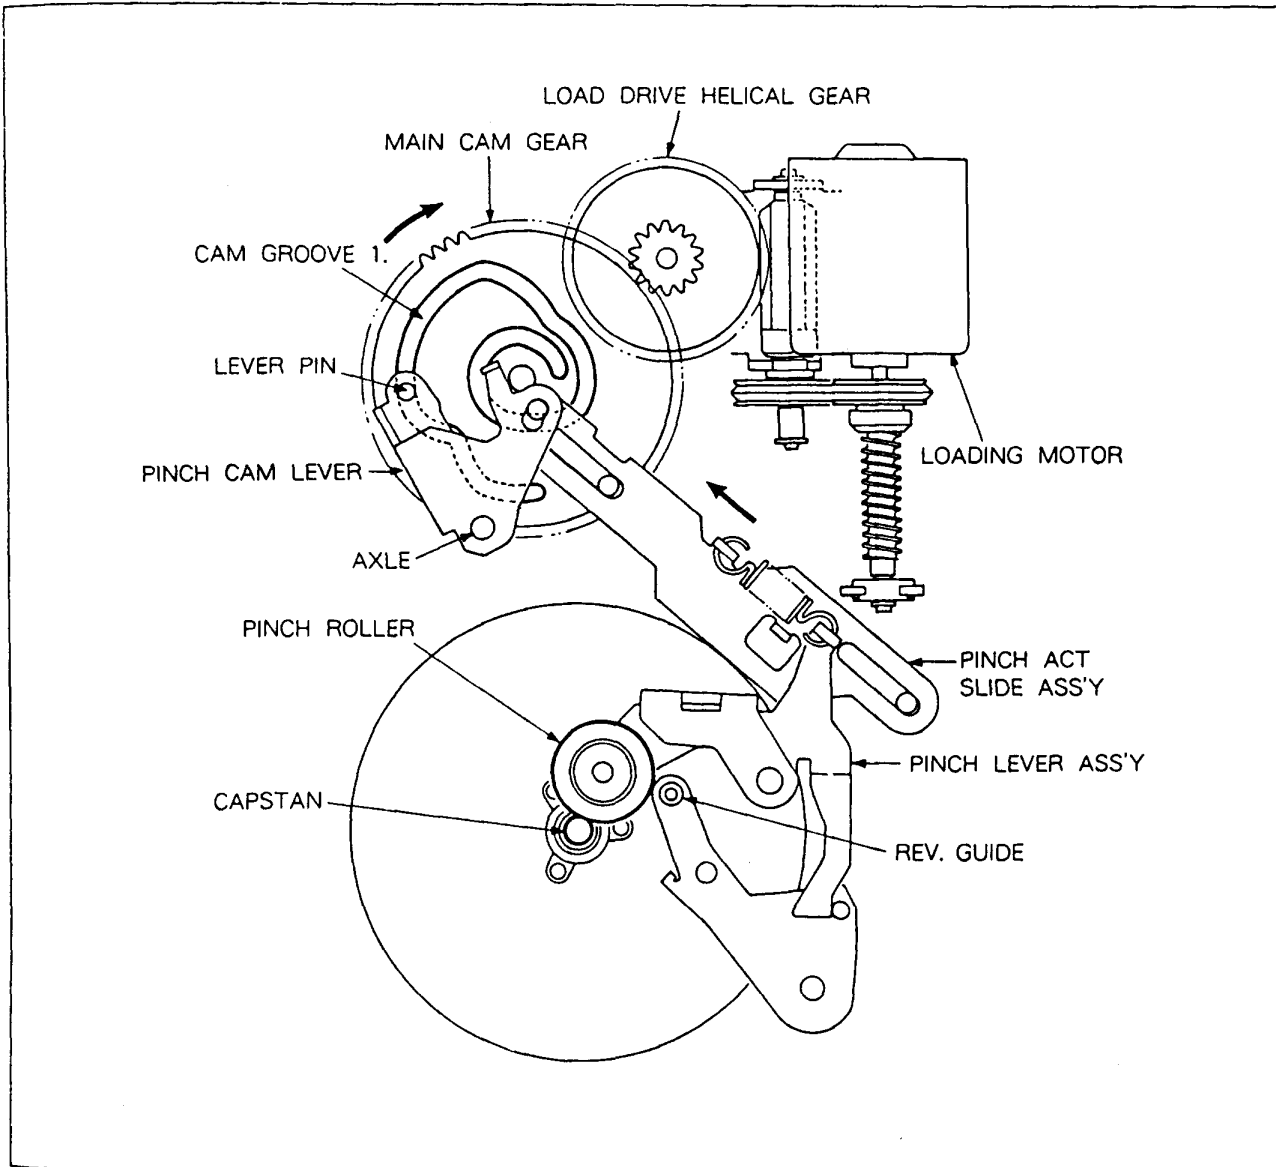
CONSTRUCTION OF PINCH ROLLER MECHANISM
